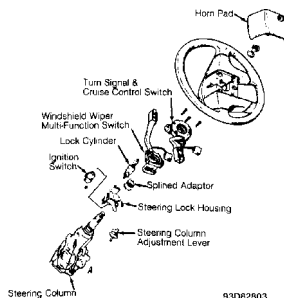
Identifying Steering Wheel Components (Corrado SLC)
